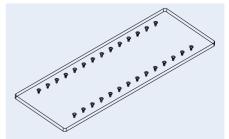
Microscopy slide through-hole platform – version with 28 fluidic interfaces
